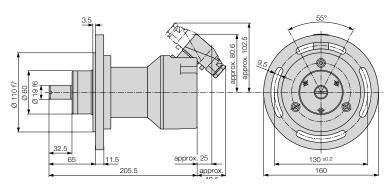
KINAX WT 707 with additional gear, plug connector and flange.
